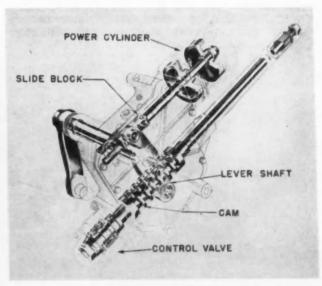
Phantom view of the mechanical-hydraulic steering system for steering the Euclid unit
